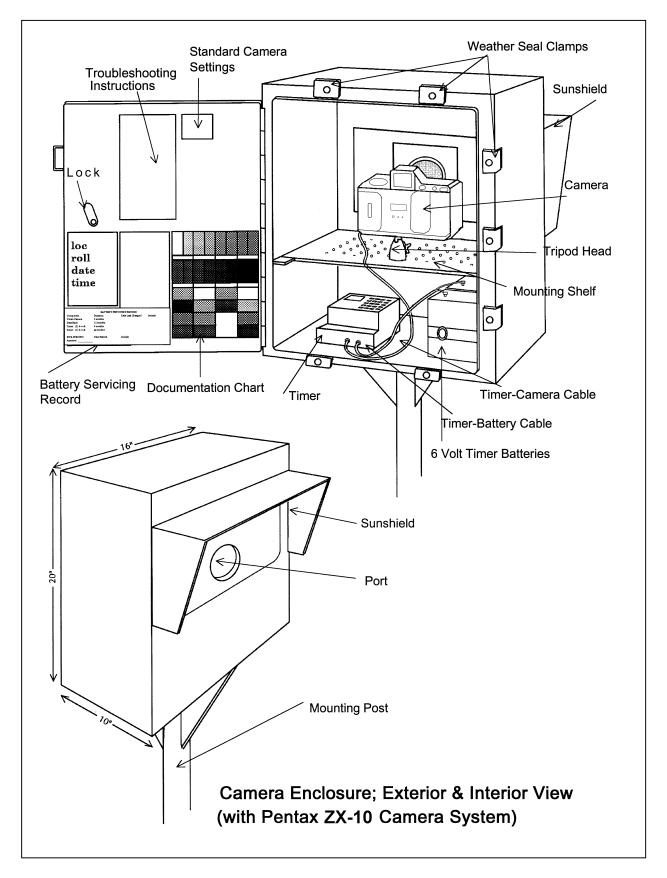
Automatic 35 mm Camera System Enclosure.
